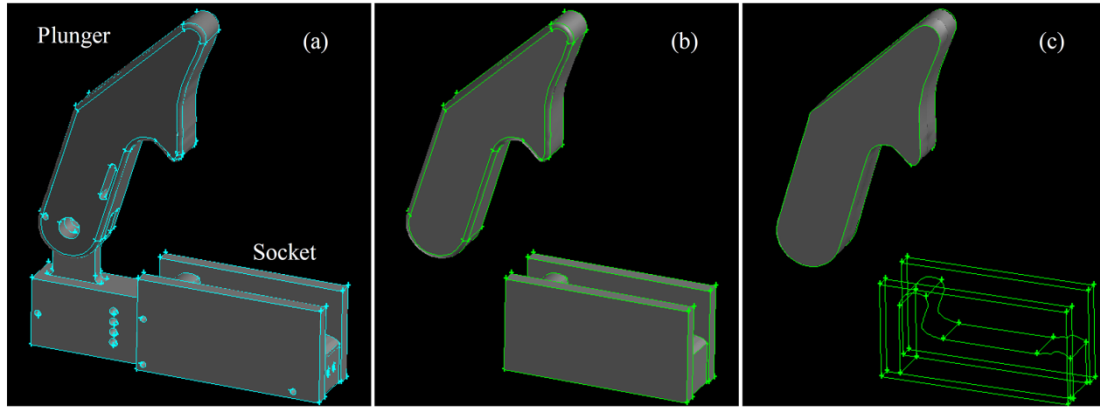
Left to right: (a) original geometry, used for enlarged scale experiments, (b) simplified geometry (hole and small features removed) and (c) final geometry (fillets removed). In (c) the wireframe of the socket is shown, providing a view to the inner geometry of the socket.
